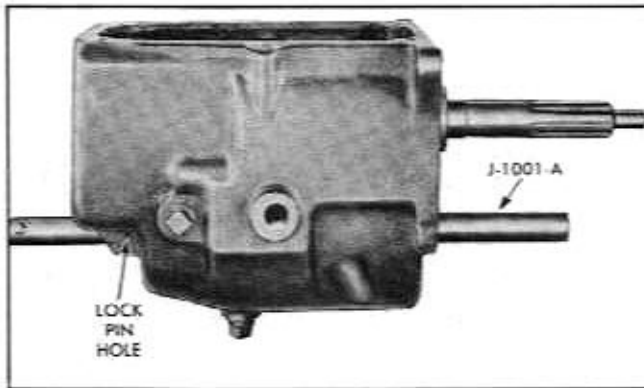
Driving Counter Gear Shaft Out of Transmission
